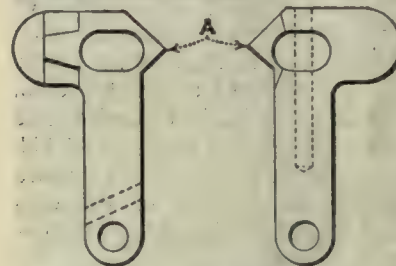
WORK PRODUCED BY TOOLS SHOWN IN FIGS. 5 AND 6
